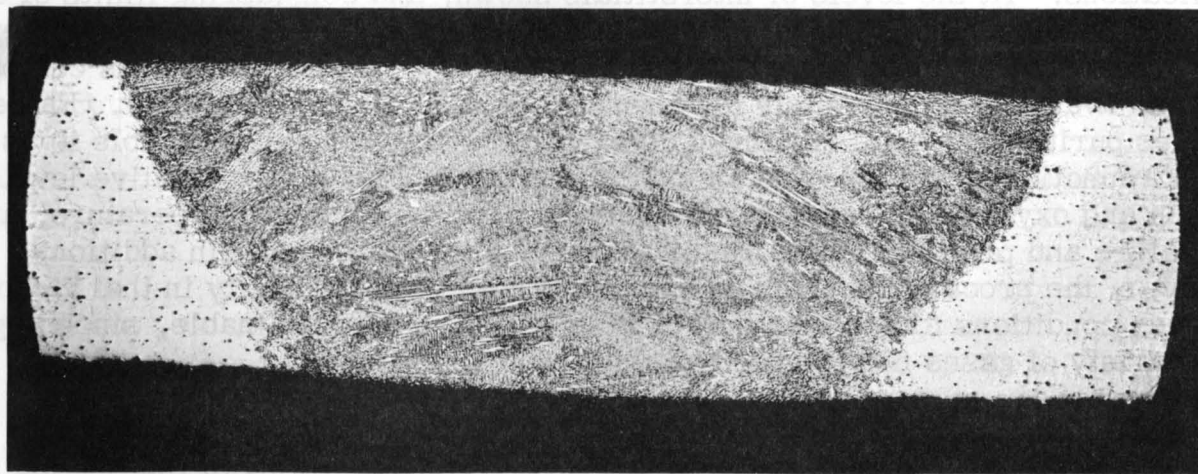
René 41 sheet--plasma E.B. weld.
